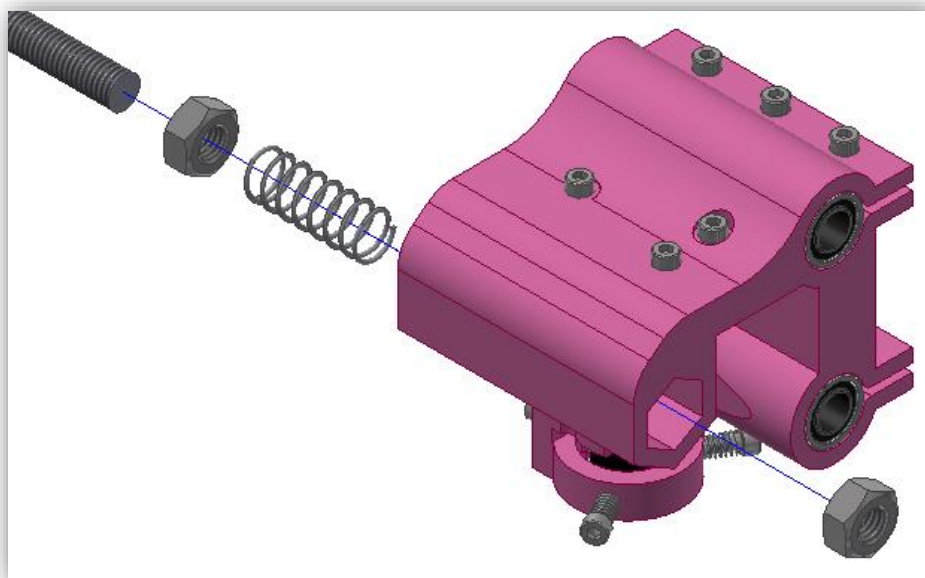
Threaded rod and nuts transmission assembly of the X axis.
